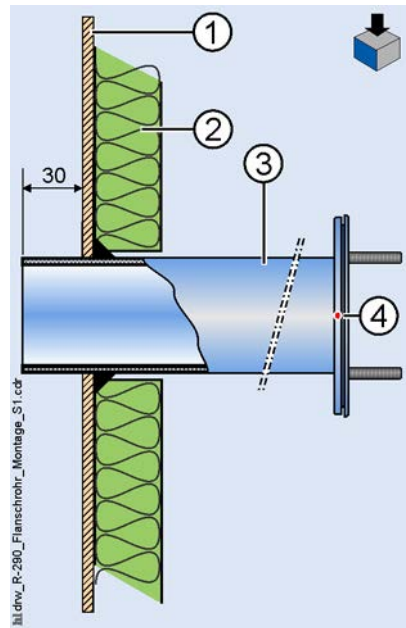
Standard welded-in pipe with adjustment flange
